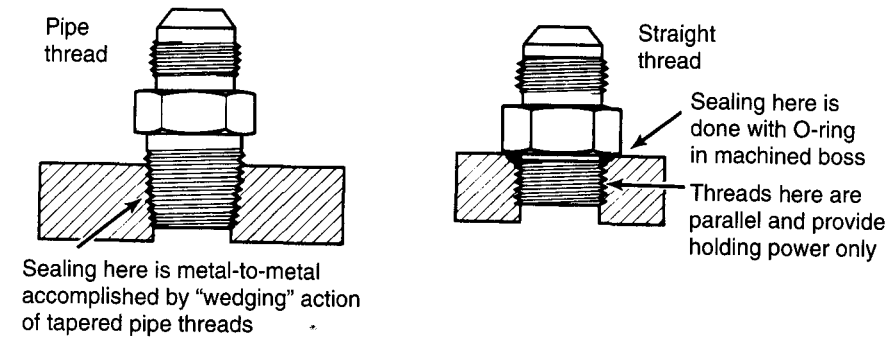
Tapered-pipe-thread versus straight-thread fittings.
